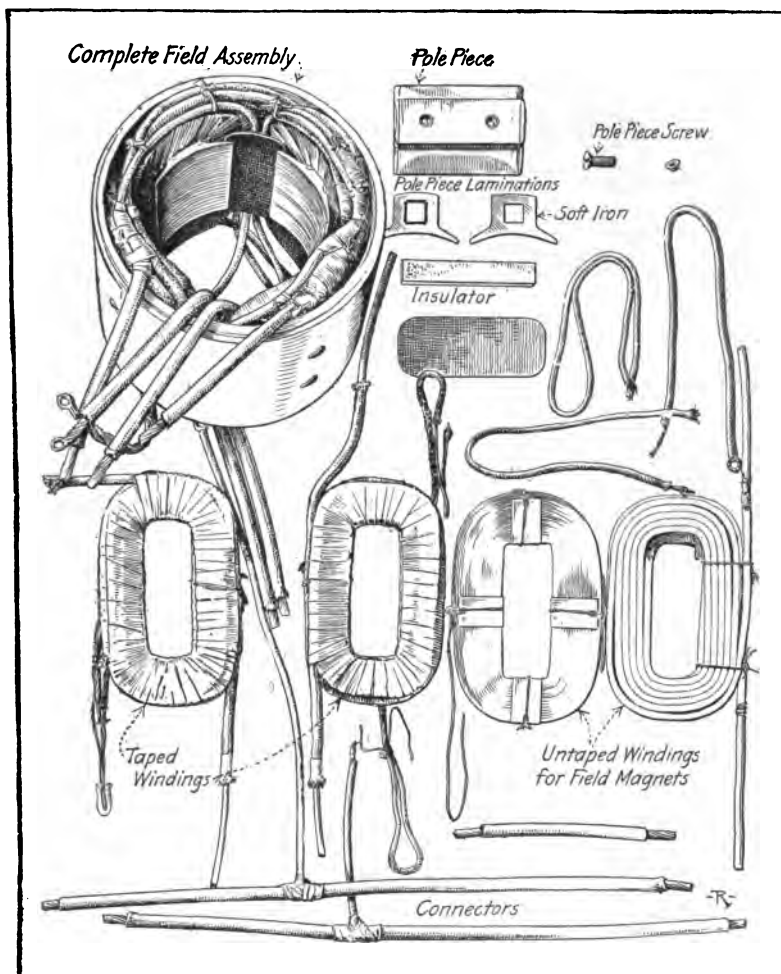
Parts of North East Motor-Generator Field Assembly.
